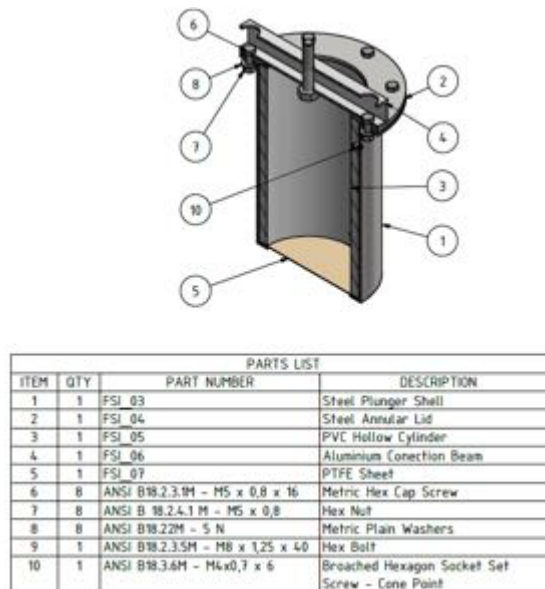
3D sectioned view of plunger assembly with list of parts (source: Rizos 2016)
